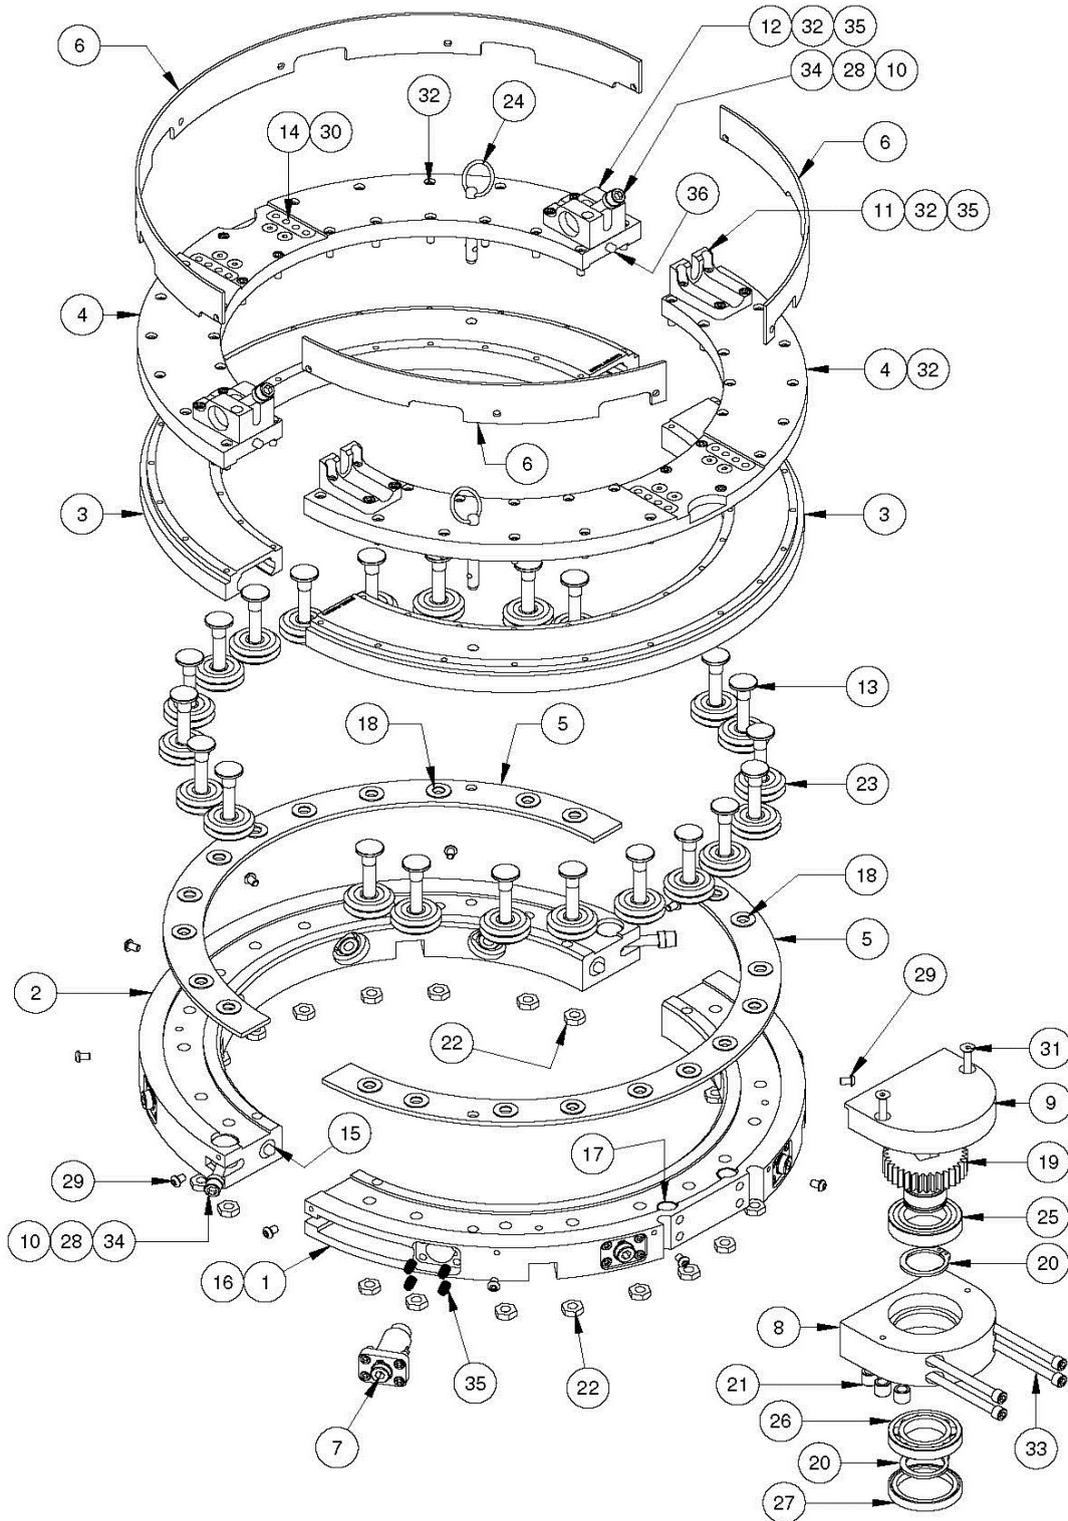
12"-30" Aluminum Body Split Frame Assembly
